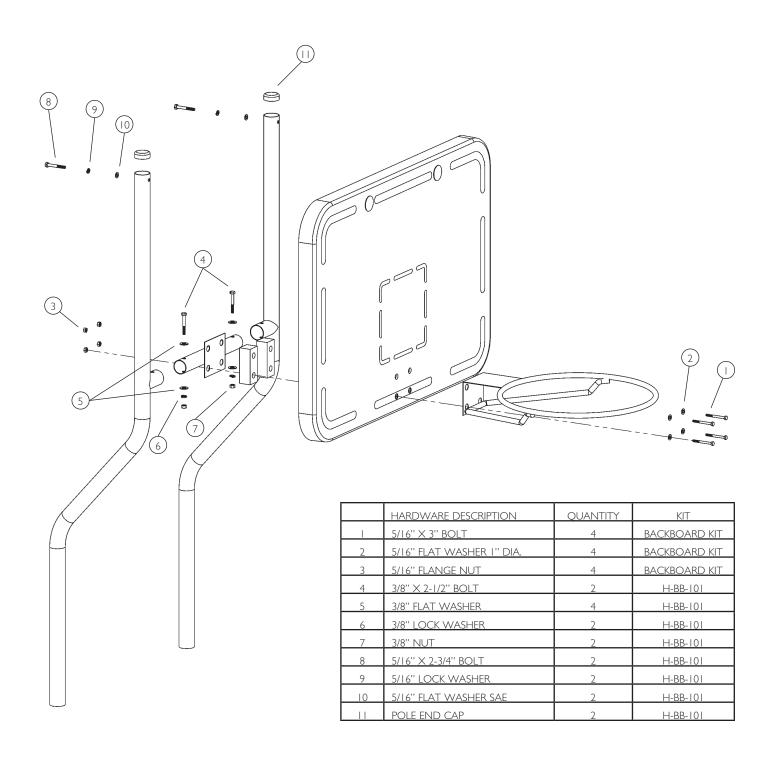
Exploded View of All Parts for Traditional Basketball Set
